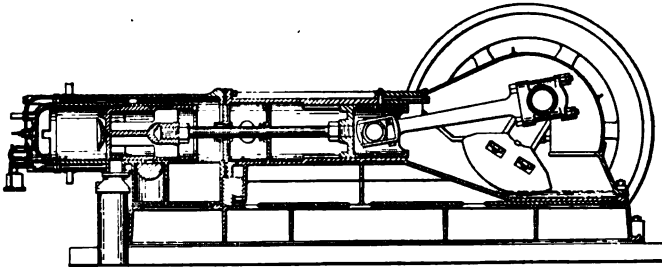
Little Giant oil engine employing hot-bolt ignition.
